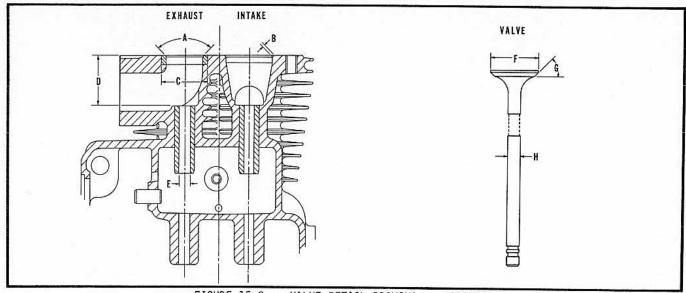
VALVE DETAIL DRAWING -- LOCATION
